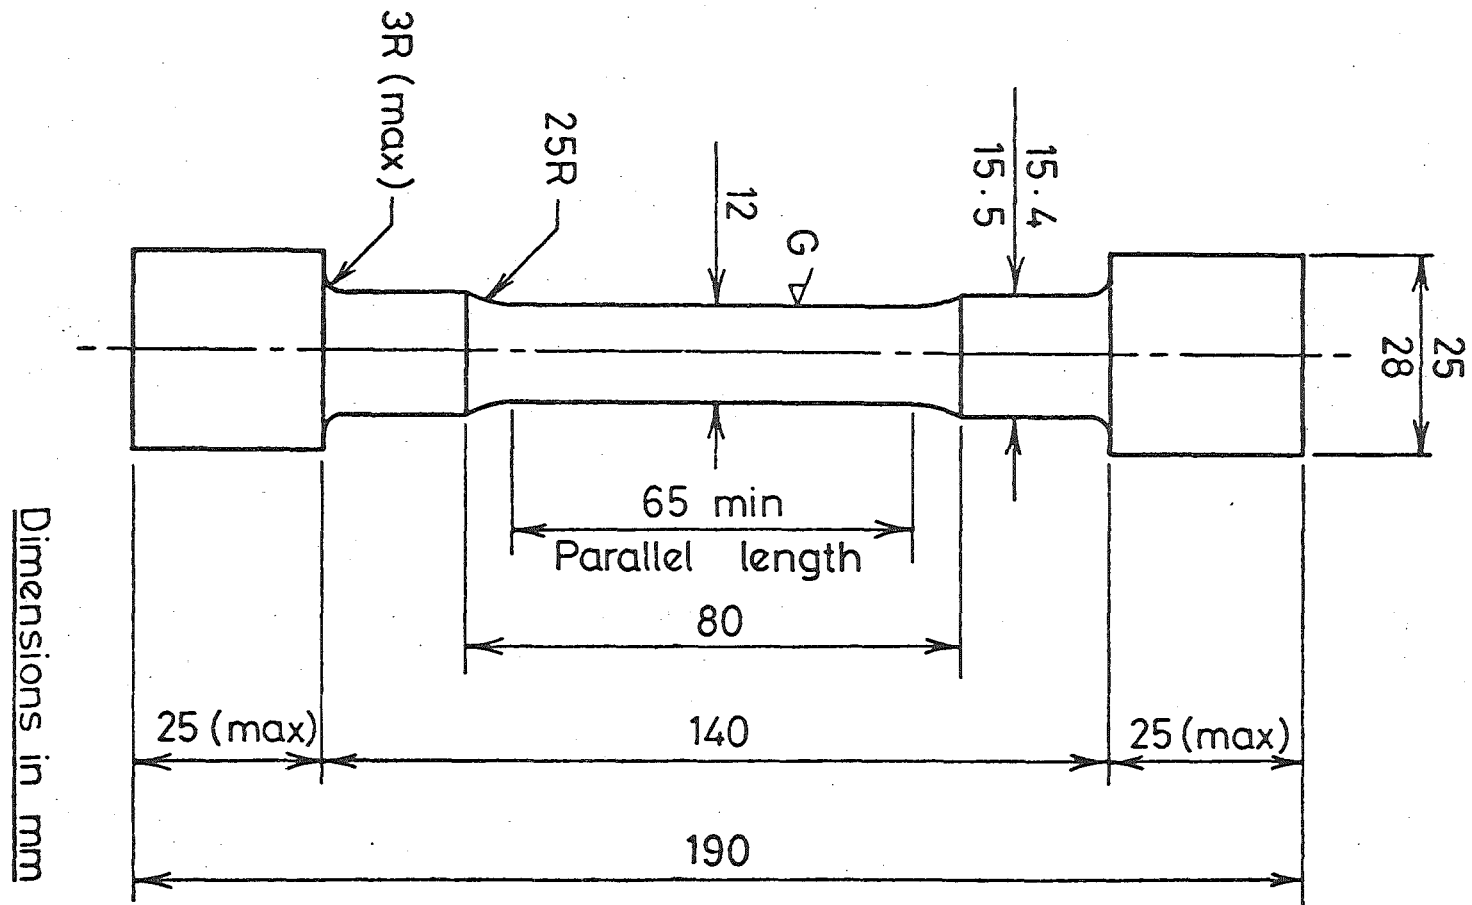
Details of the 12 mm diameter tensile specimen.
